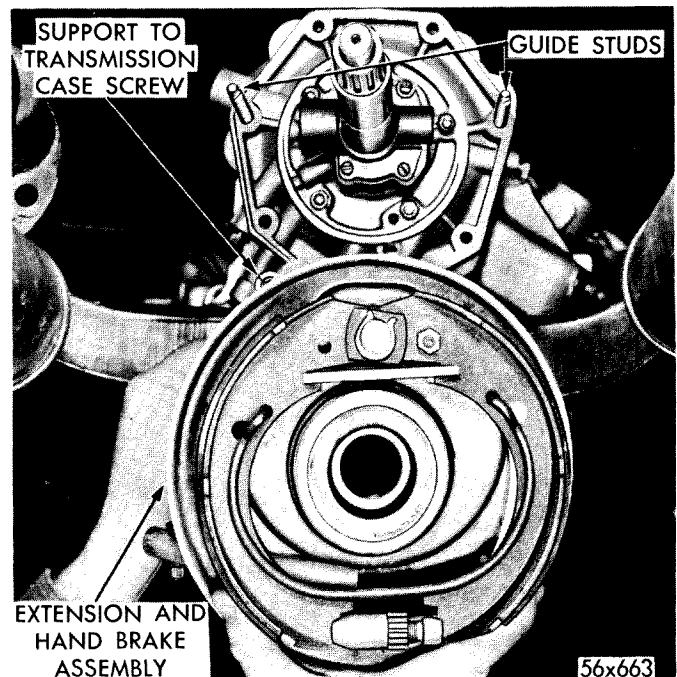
Removal and Installation of Extension and Handbrake Assembly
